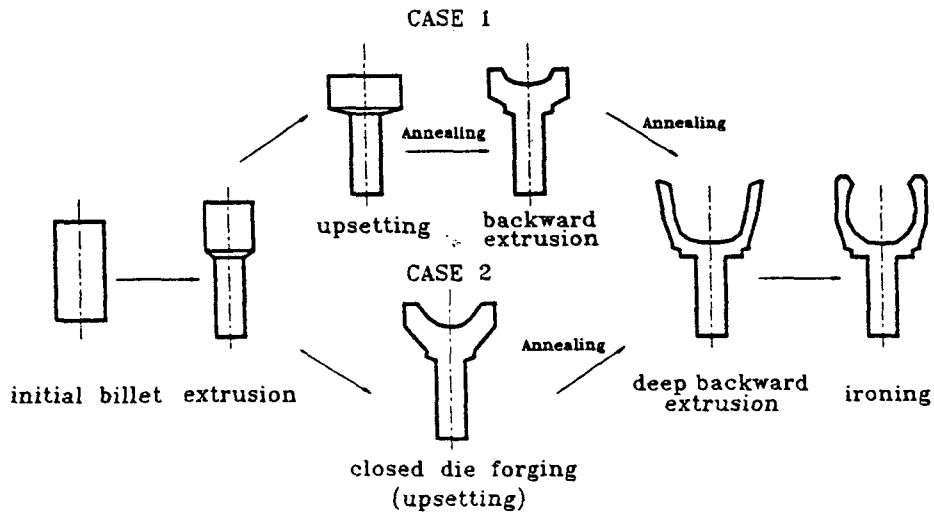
Suggested processes of cold forging to form a constant velocity joint housing
